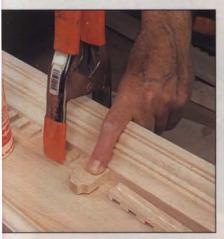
Photo H: Instead of trying to end up with a full tooth at both ends of the front dentil strip, use two half-length strips with a decorative block in the middle to solve the spacing problem.
